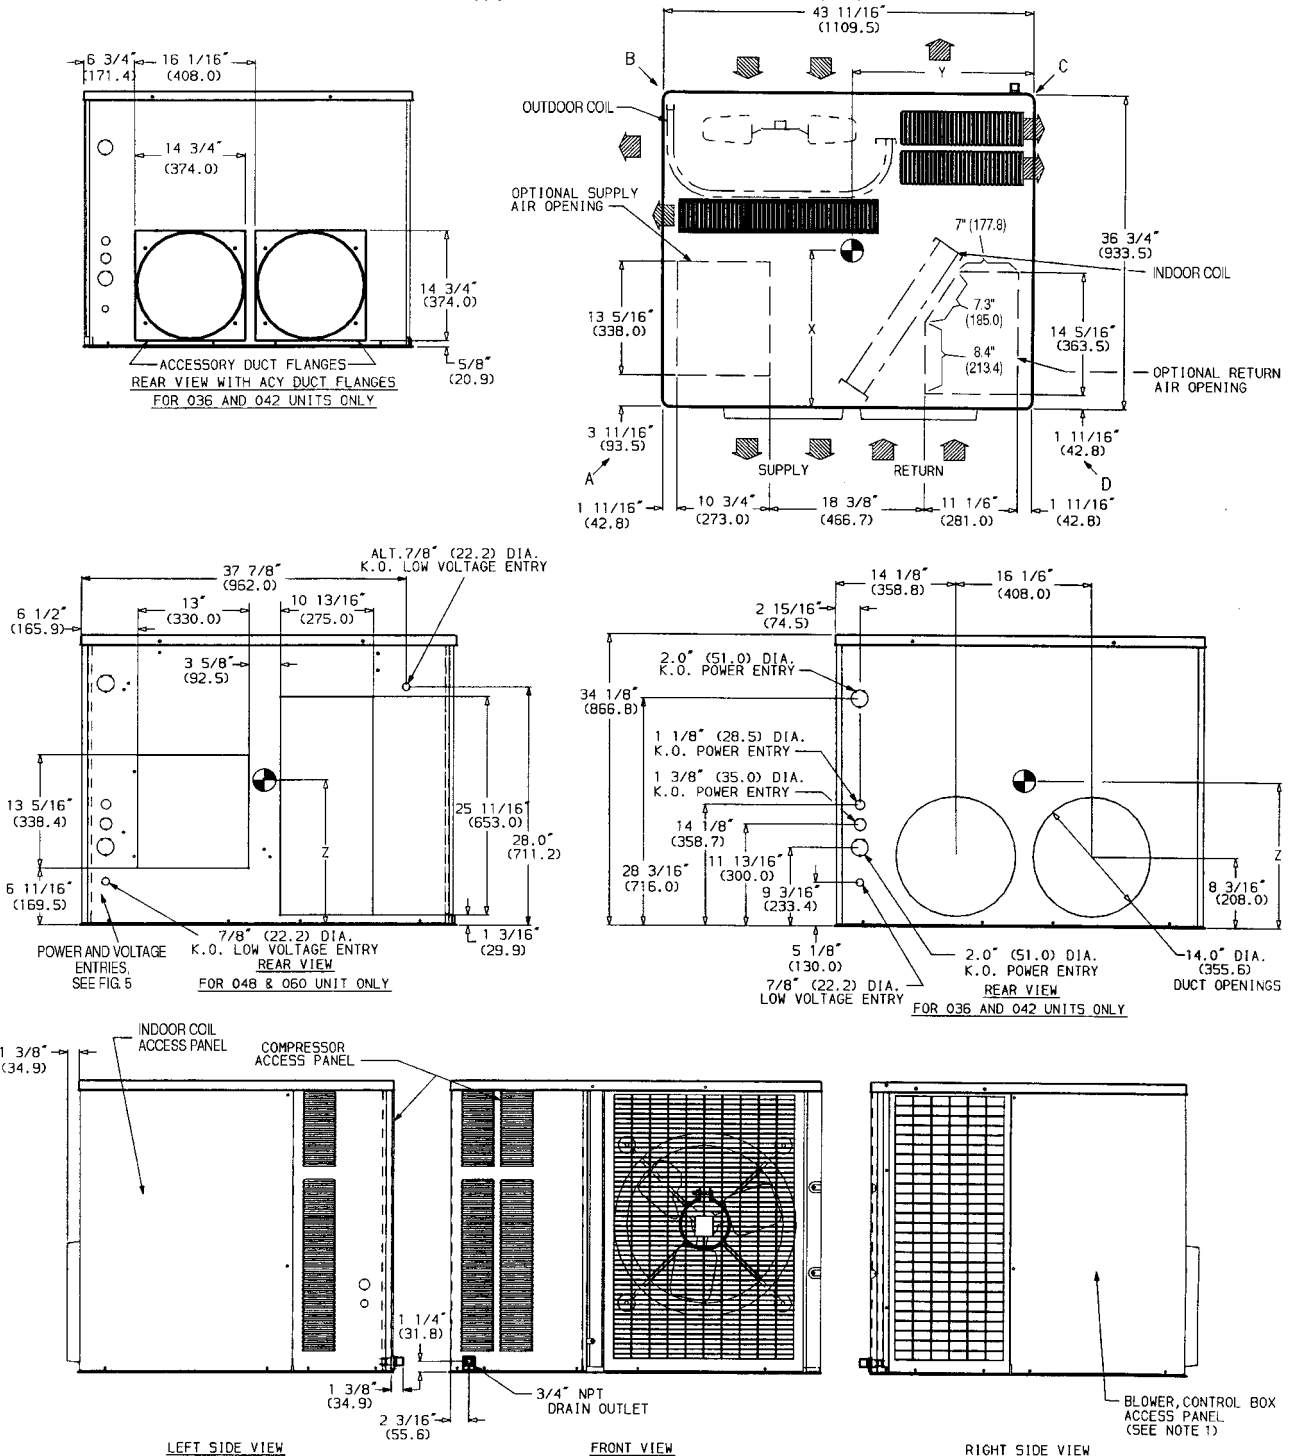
Dimensions; 657A036-060 Without Base Rail
